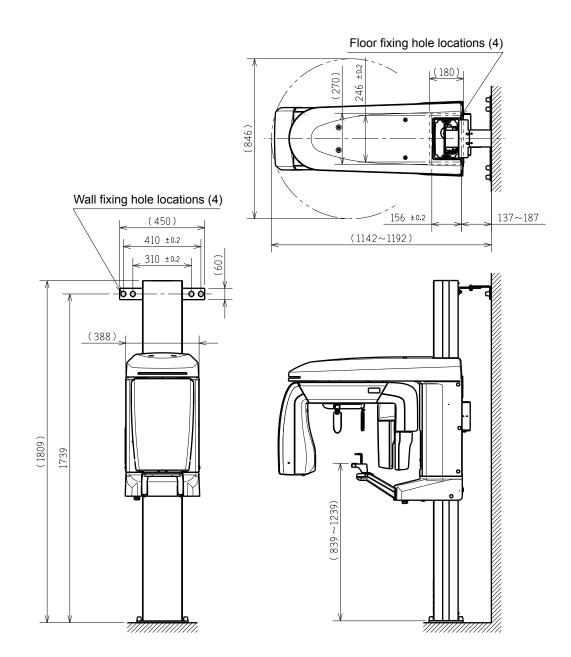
Fixing hole location measurements (Standing position wall-mount short type: 3D type)
